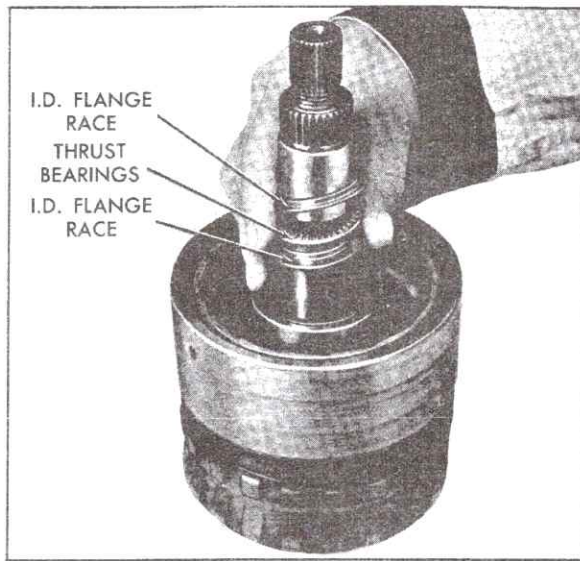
Installing Races and Thrust Bearing over Sun Gear Shaft
